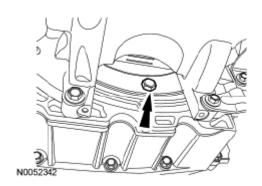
Locating Oil Pan-To-Transaxle Bolts Courtesy of FORD MOTOR CO.
